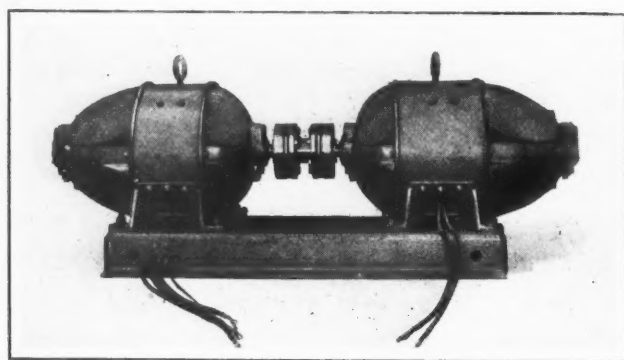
A Welded Base Similar in Appearance to a Cast Base, but Unnecessarily Expensive
